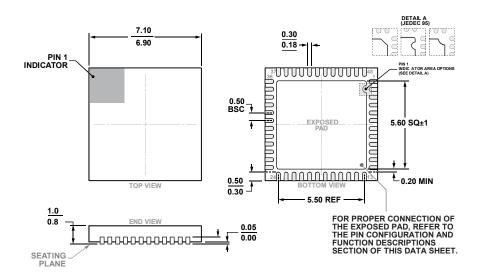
0 . 48-Lead VQFN Dimensions shown in millimeters
